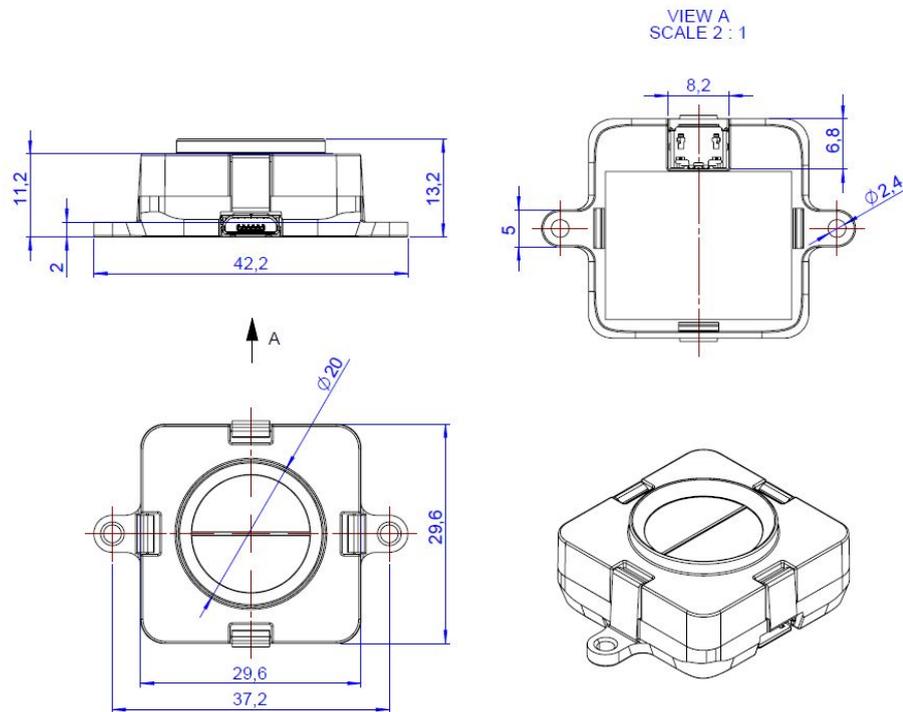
TeraRanger Evo Swipe external dimensions, USB backboard
